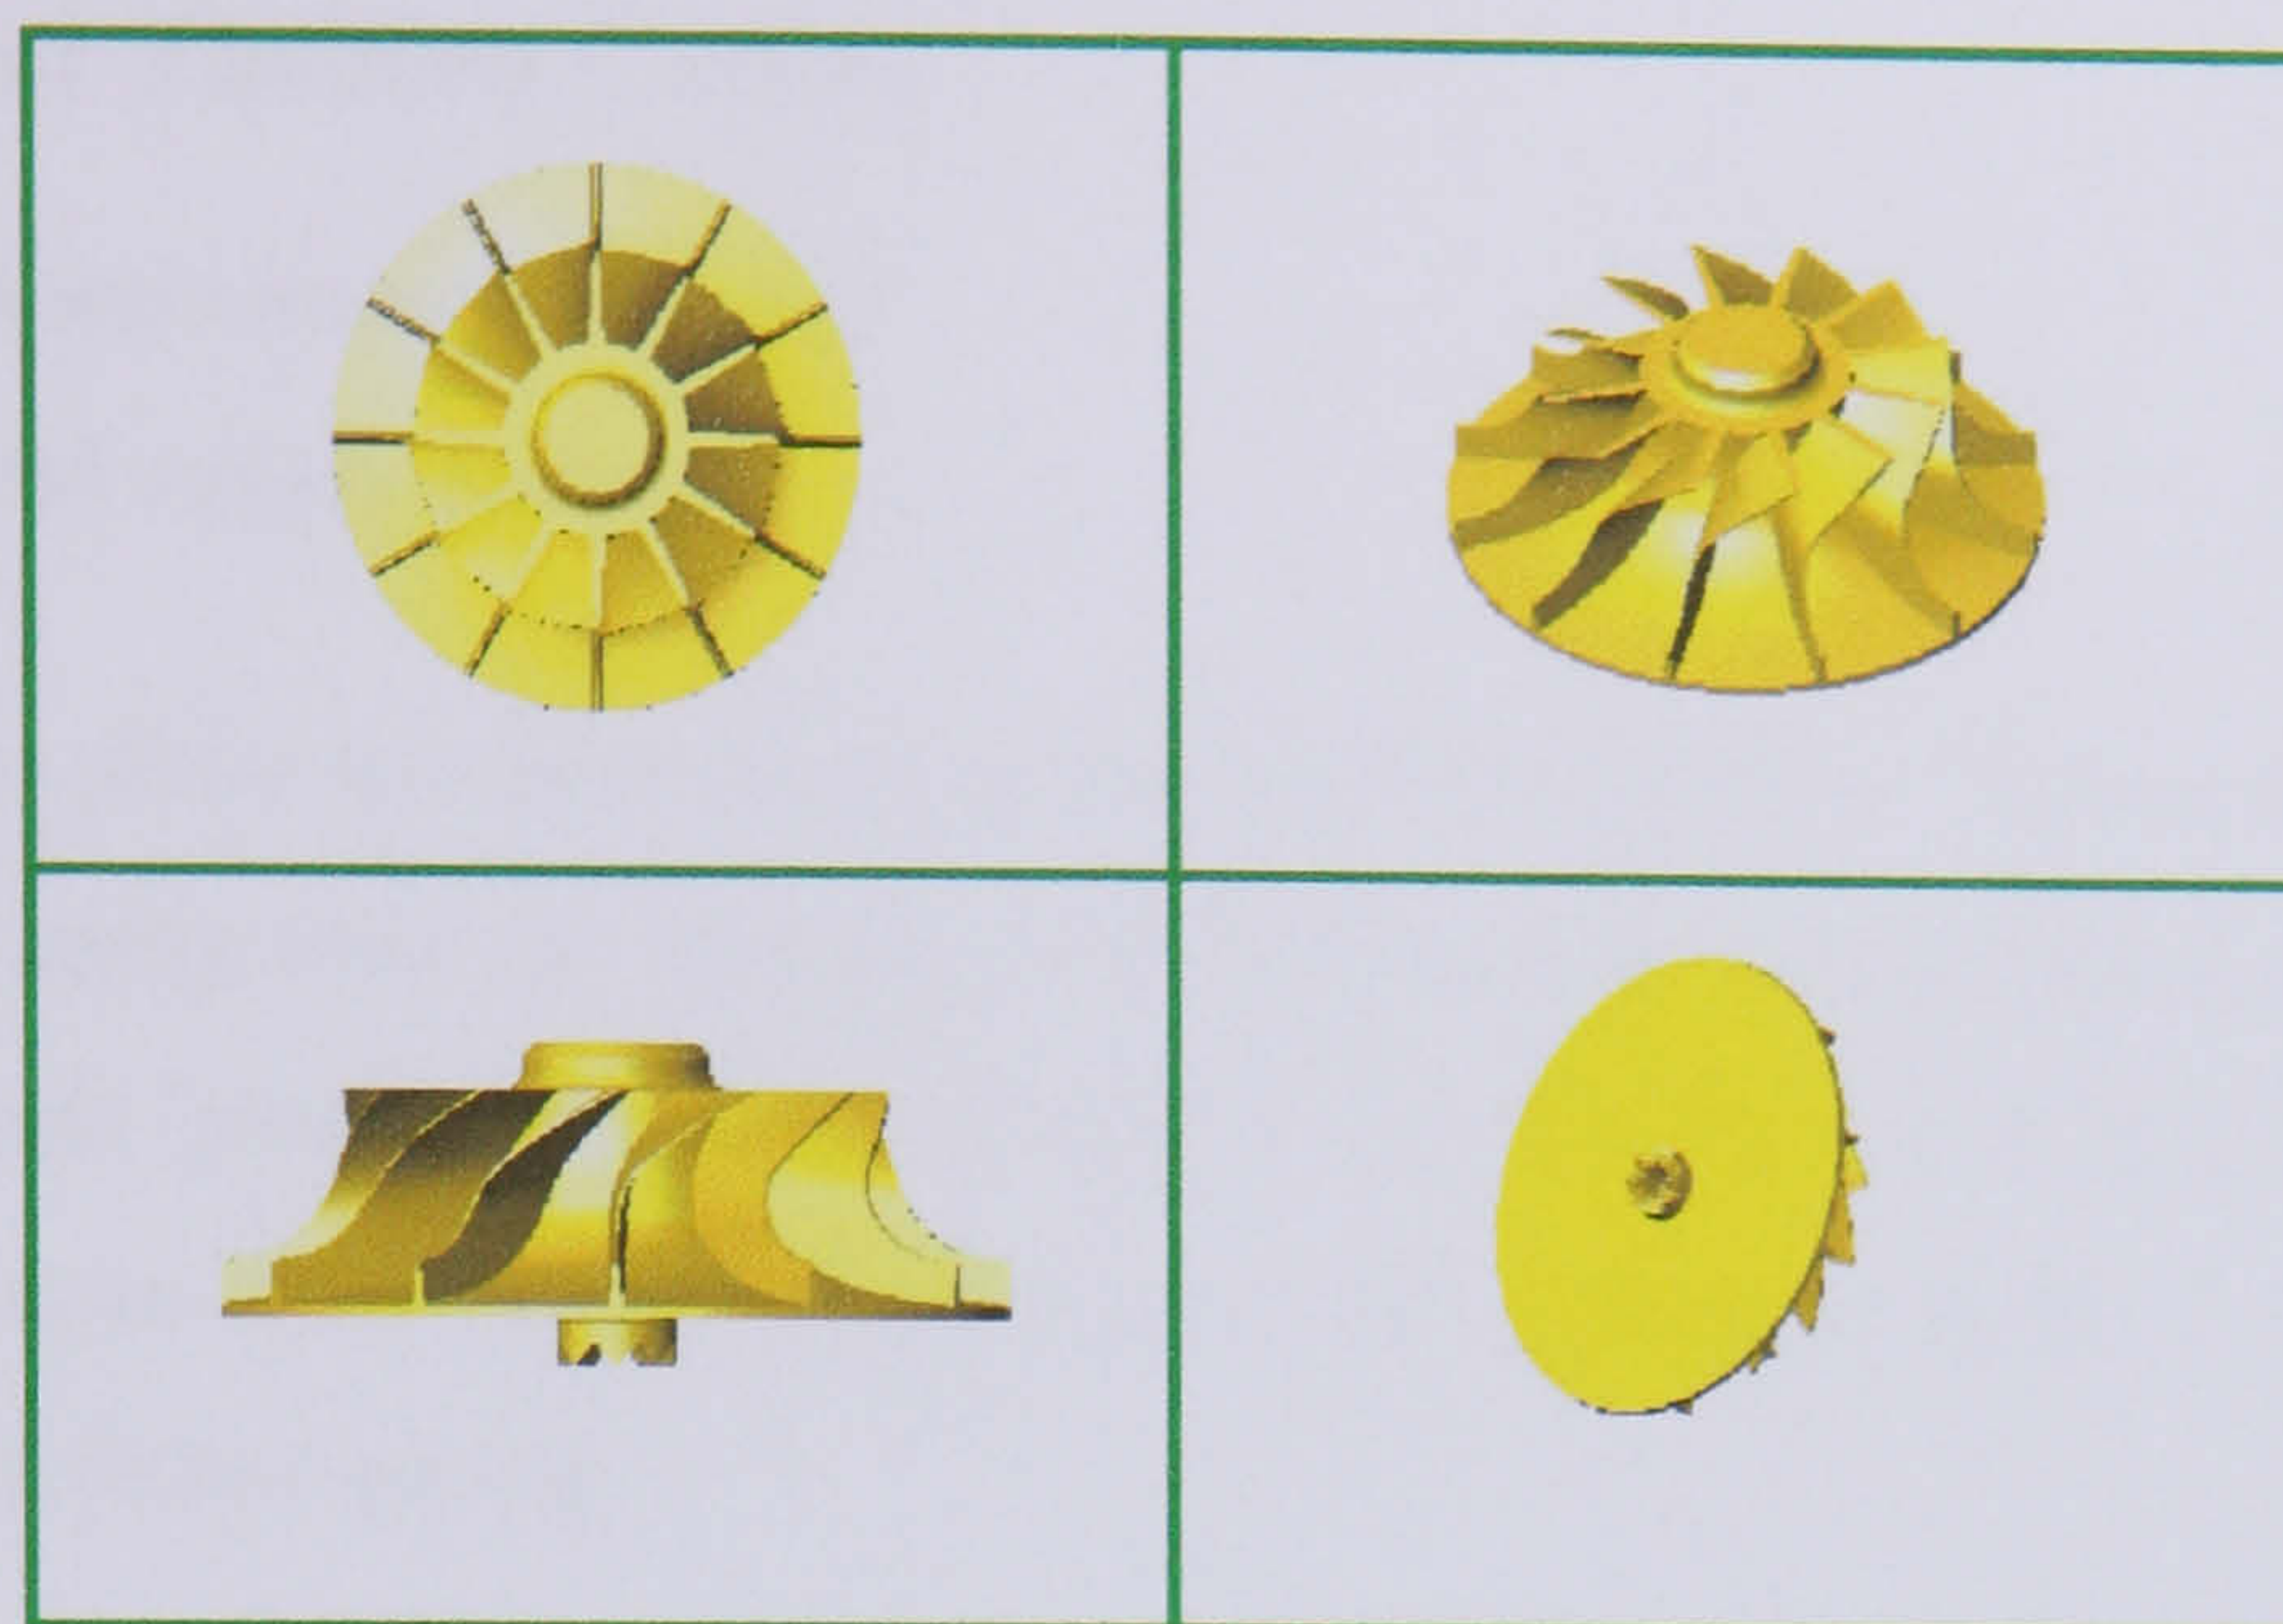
THREE DIMENSIONAL SOLID MODEL OF THE DESIGNED TURBINE ROTOR
